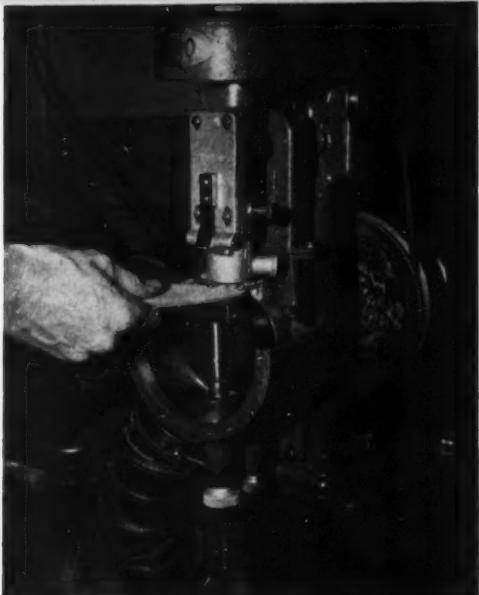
Holder for circular cutters is molded of rubber-phenolic, has integrally-molded pegs. The cutters do not rattle when the machine is in use and good shop appearance is maintained
